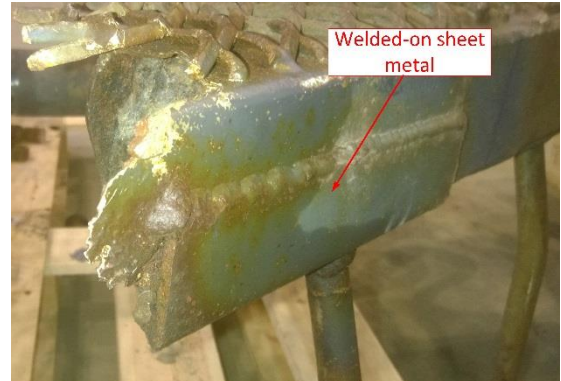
Sheet metal welded onto the right drawbar rod during repair work. Photo: AIBN
